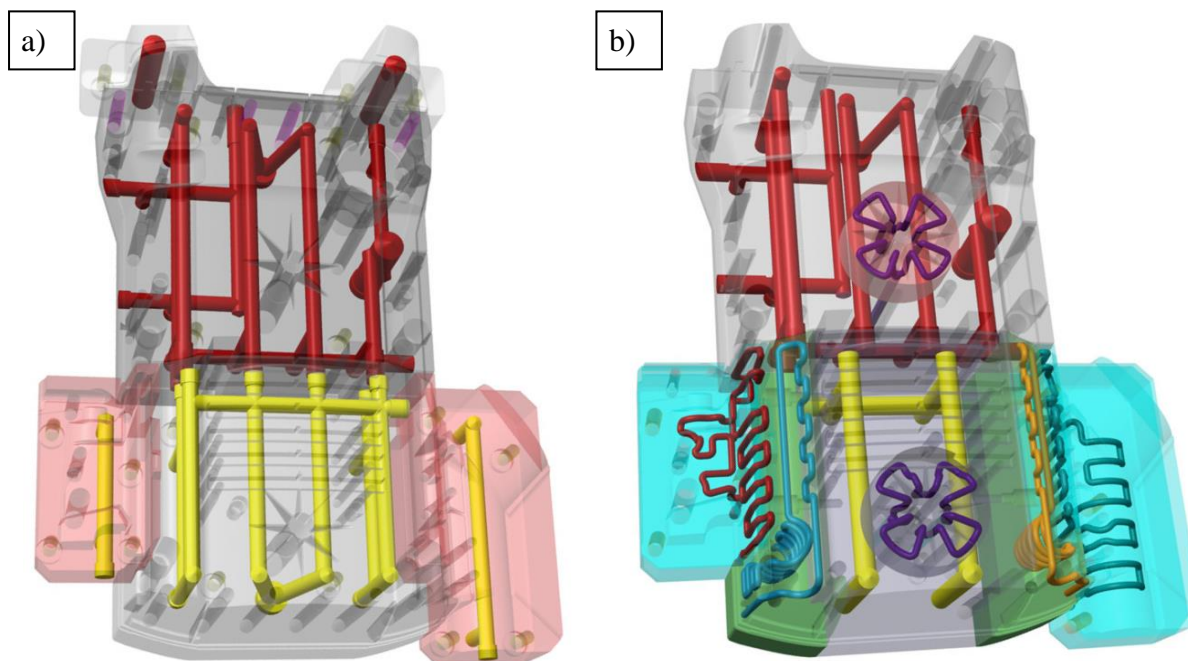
a) Original design of the K2 rear yellow washer moulding tool, b) New conformal-cooled tool design for moulding the rear yellow housing of the K2 washer [6]
